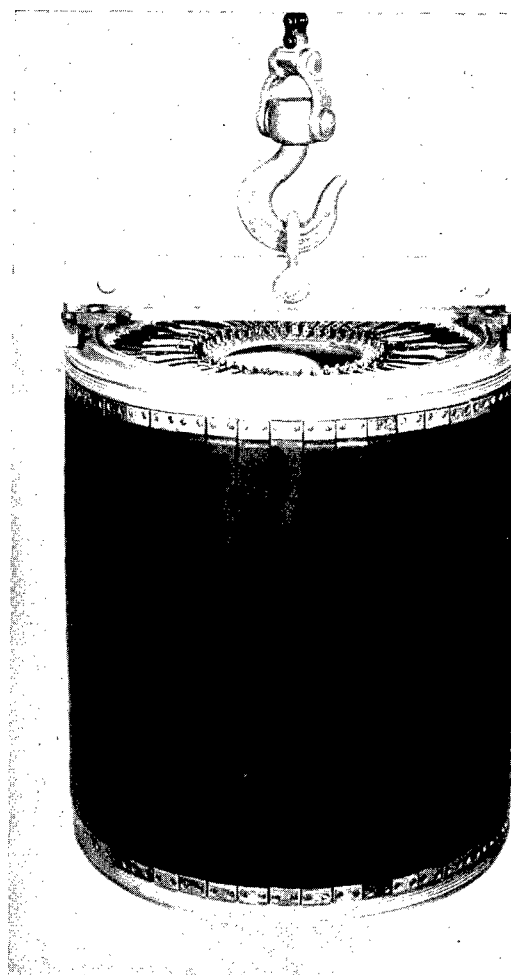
Assembly view of HP-3 transducer without boot (inverted).
